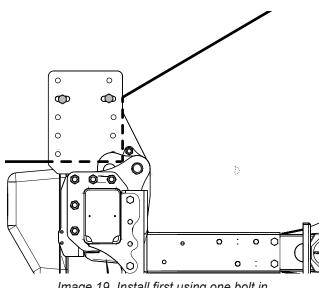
Install first using one bolt in the bracket's slot-shaped holes.
